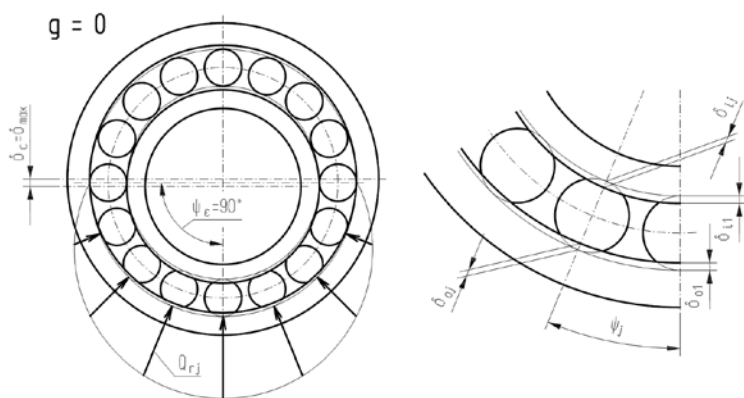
Bearing with radial clearance $g = 0$ after loading with force F_r
